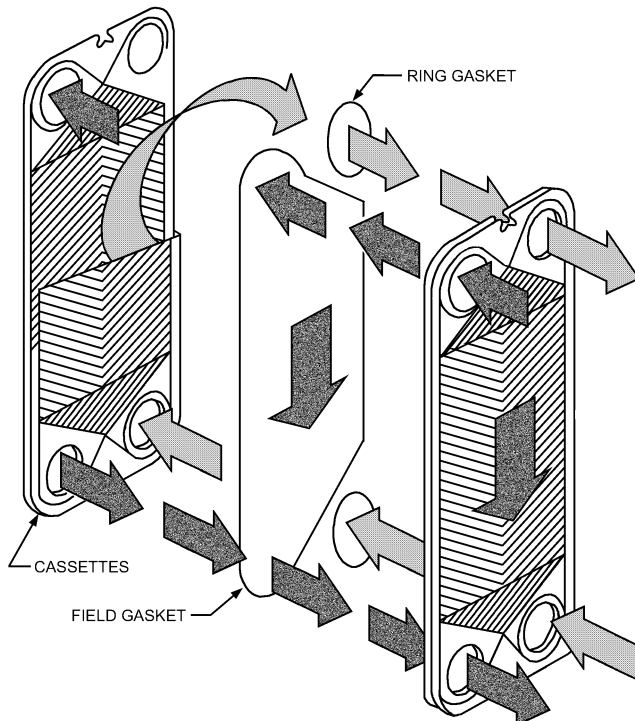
Flow Path of Gasketed Plate Heat Exchanger
